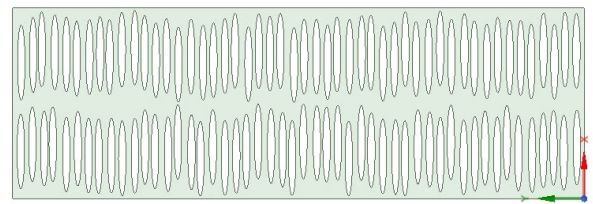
Examples of elliptical hole geometries with $b : a = 1 : 5$
